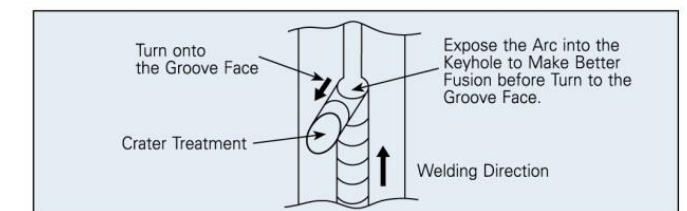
How to terminate the weld crater in order to prevent the crater from cracking.
